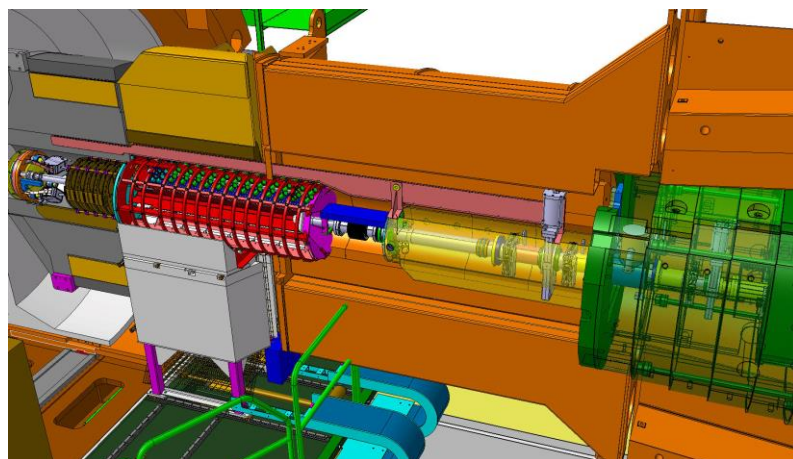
3D view of the CMS forward shielding region with the TAXS and vacuum module. The layout corresponds to the Run 3 configuration. The TAXS absorber is located on the right inside the Fixed Iron Nose shielding (FIN, in green) and the surrounding rotating shielding (in orange). The relocated vacuum assembly module (VAX) on the IP side is shown inside the baseplate support (transparent yellow).
